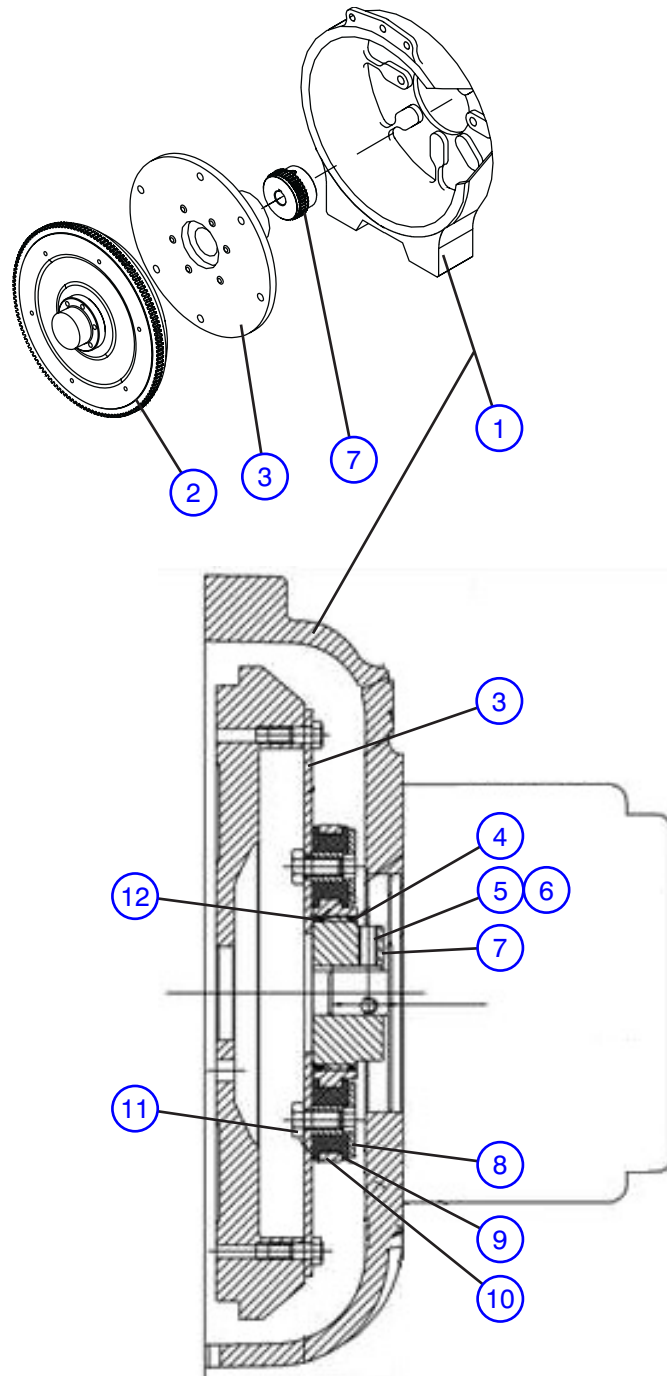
Dual Fuel Engine Assembly (GM Engine) (Continued)
